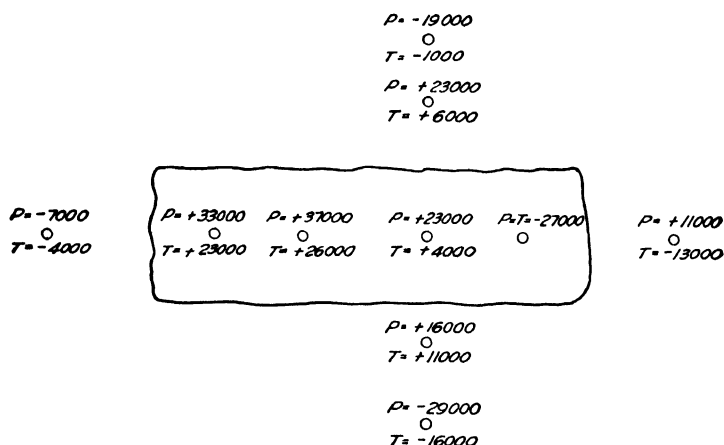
Shrinkage stresses in patch weld. (Stablein,⁽³⁶⁾)
